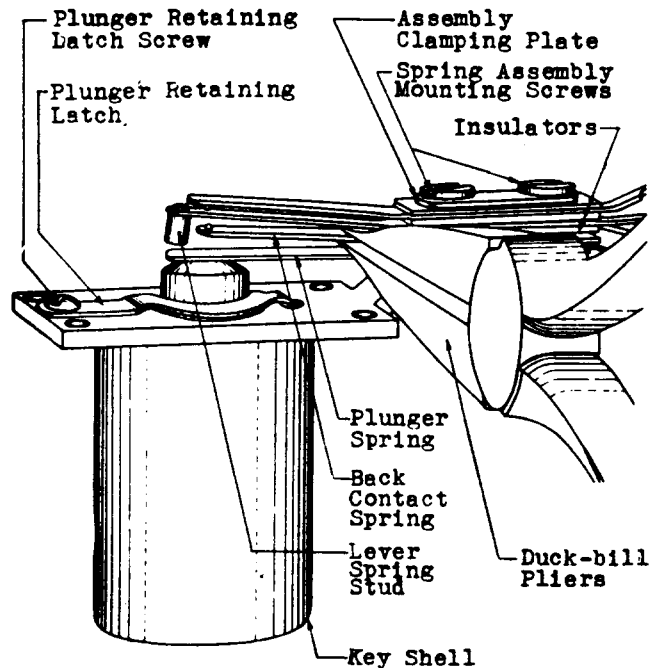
Method of Adjusting Springs of No. 520-F, J and K Keys
